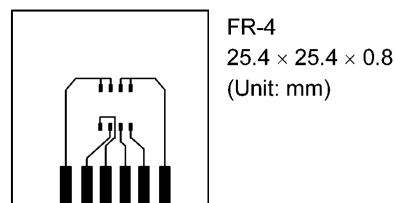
Device Mounted on a Glass-Epoxy Board (b)
